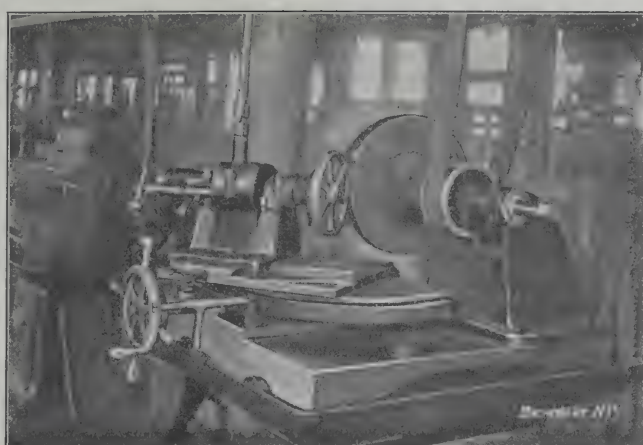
Special Machine for Grinding Rims of Hand-wheels
